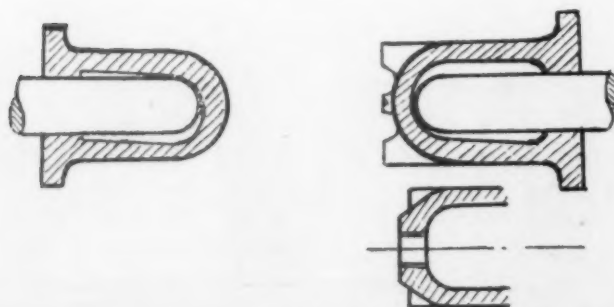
GREATER SIZE OF CORED HOLE (RIGHT) IN HYDRAULIC RAM CASTING HAS ADVANTAGE OF SMALLER CORE HOLE (LEFT).
